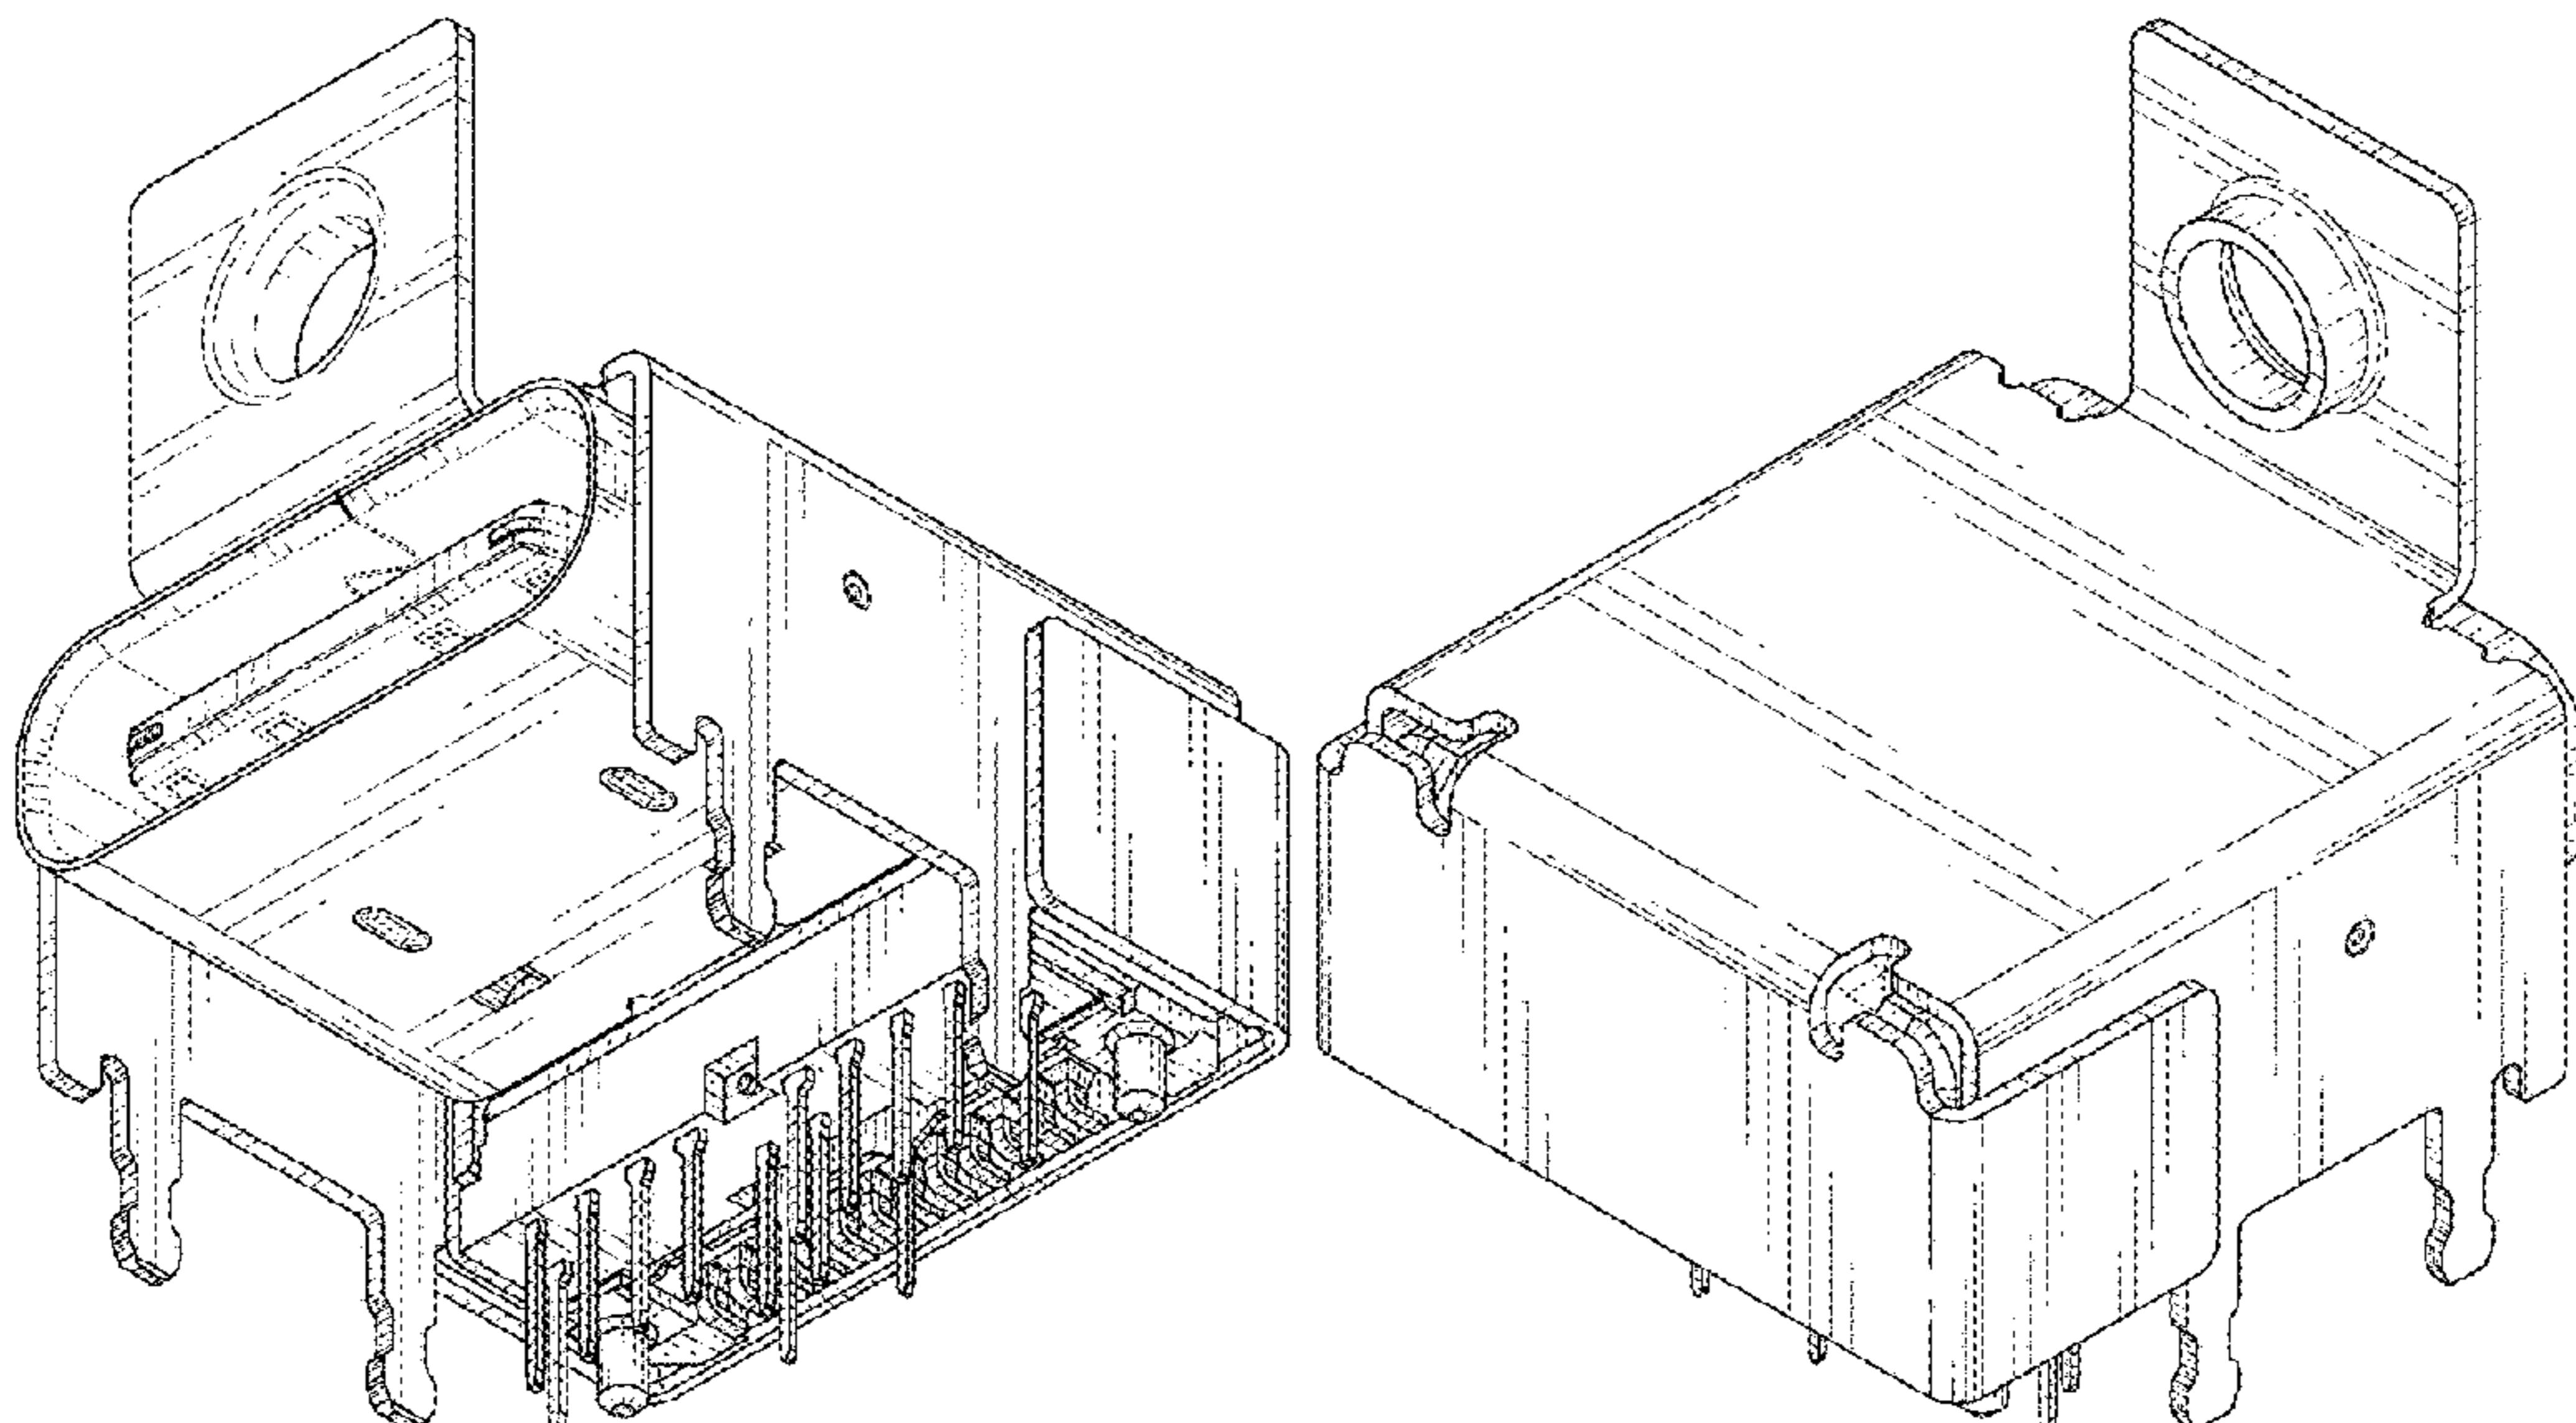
is a perspective view showing a front, right and bottom side thereof; and,
